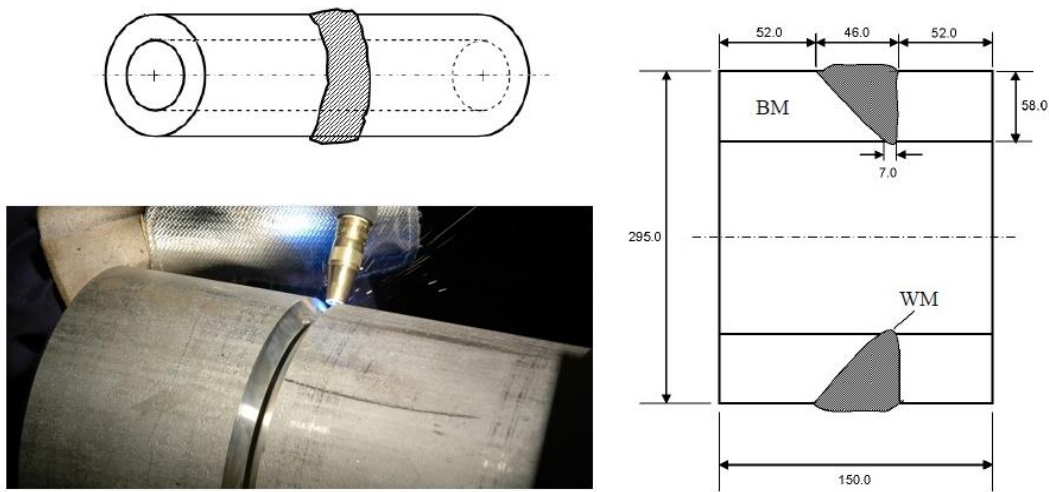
P91 Pipe circumferential weldment [80].
